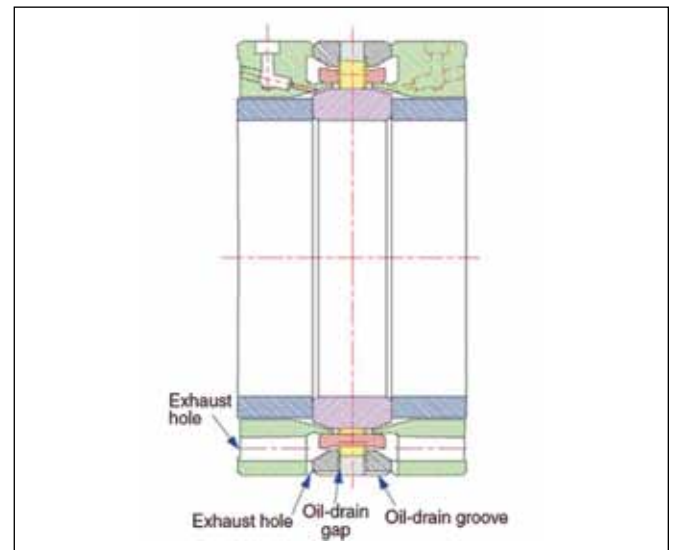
Oil-drain/groove-structure, NU-type cylindrical roller bearing.
